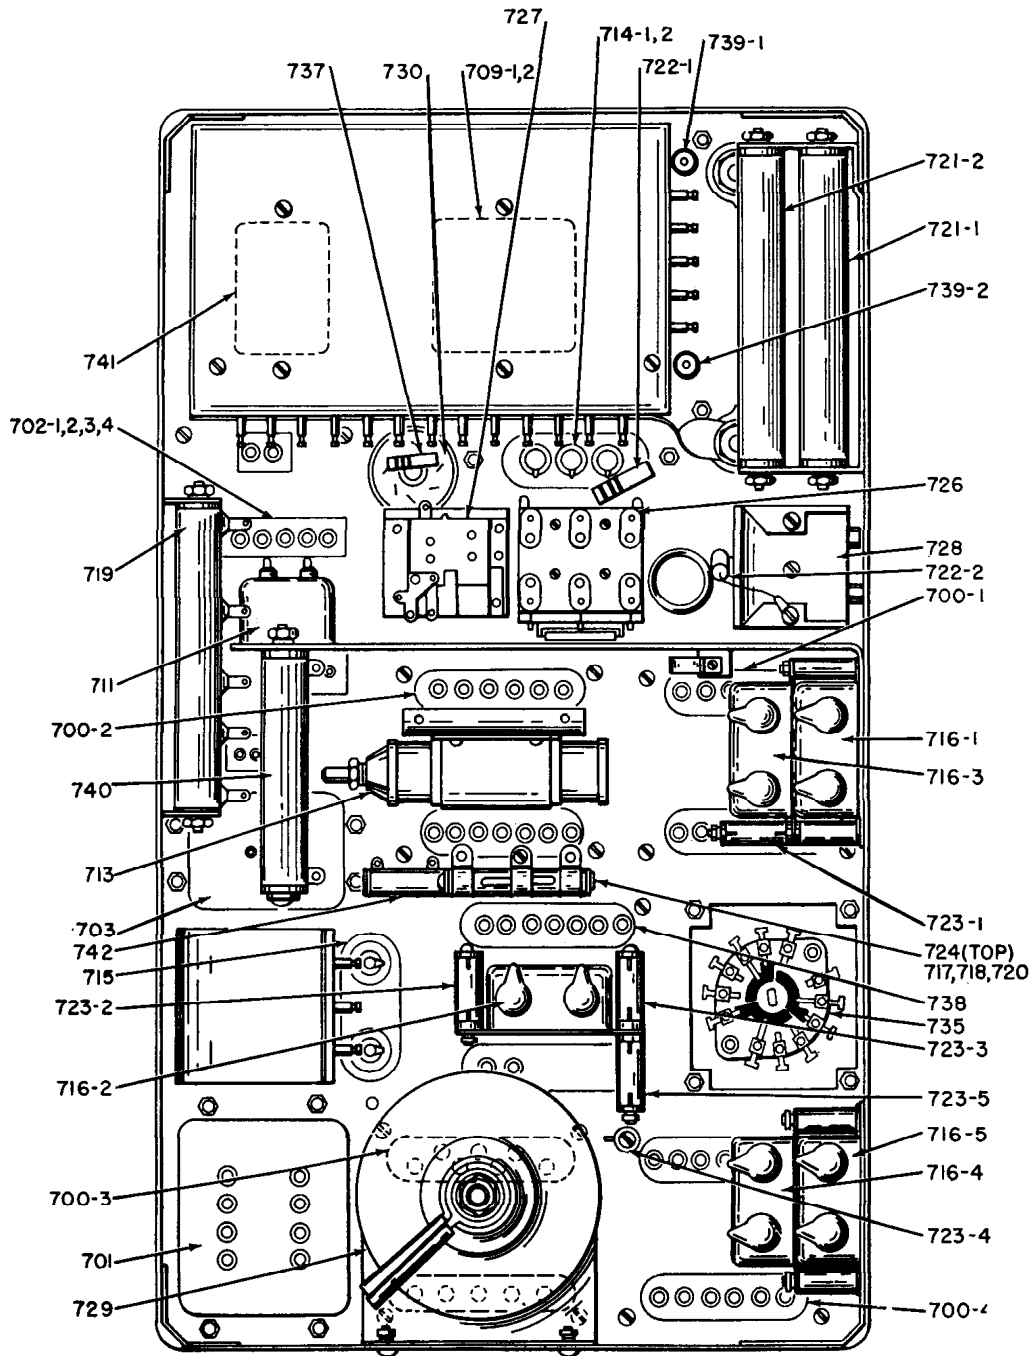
Vibrator Power Supply PE-237 (later models), top view, for parts identification purposes.
